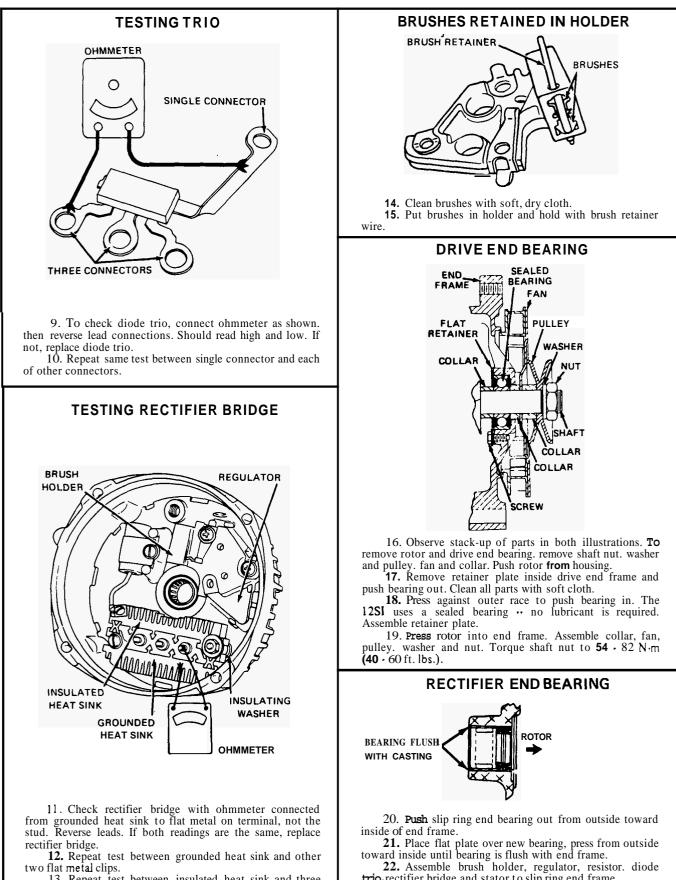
D-20A 12 SI Generator Disassembly, Test, and Reassembly 1 of 2
